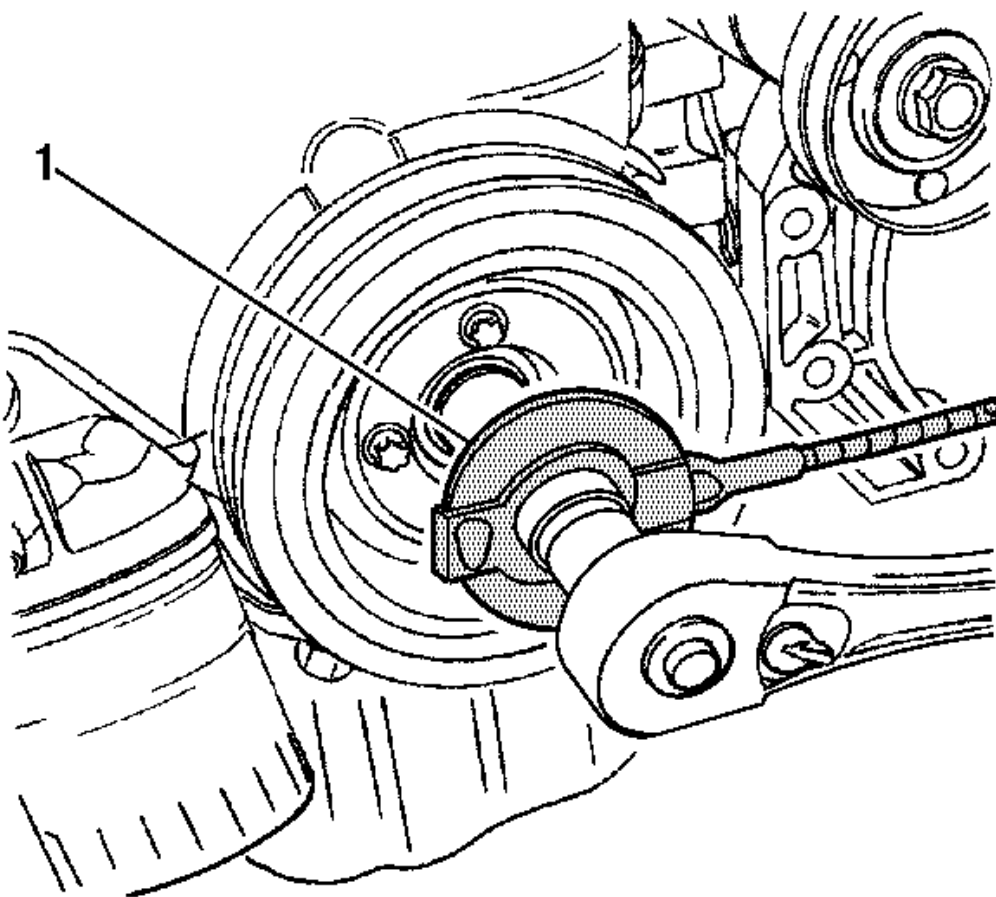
View Of Drive Gear Bolt Torque Tool KM-470-B
